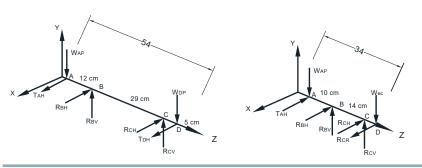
Forces acting on driving shafts and their locations (all dimensions are in cm)
